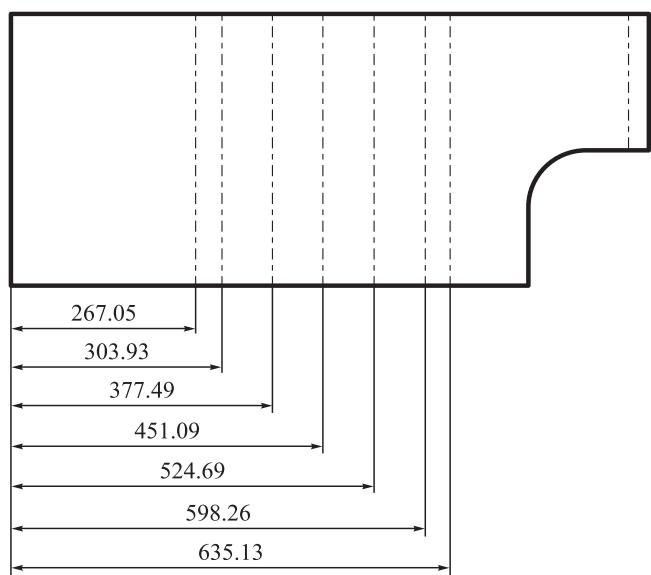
Expanded view of the deformable billet with indication of bending lines
